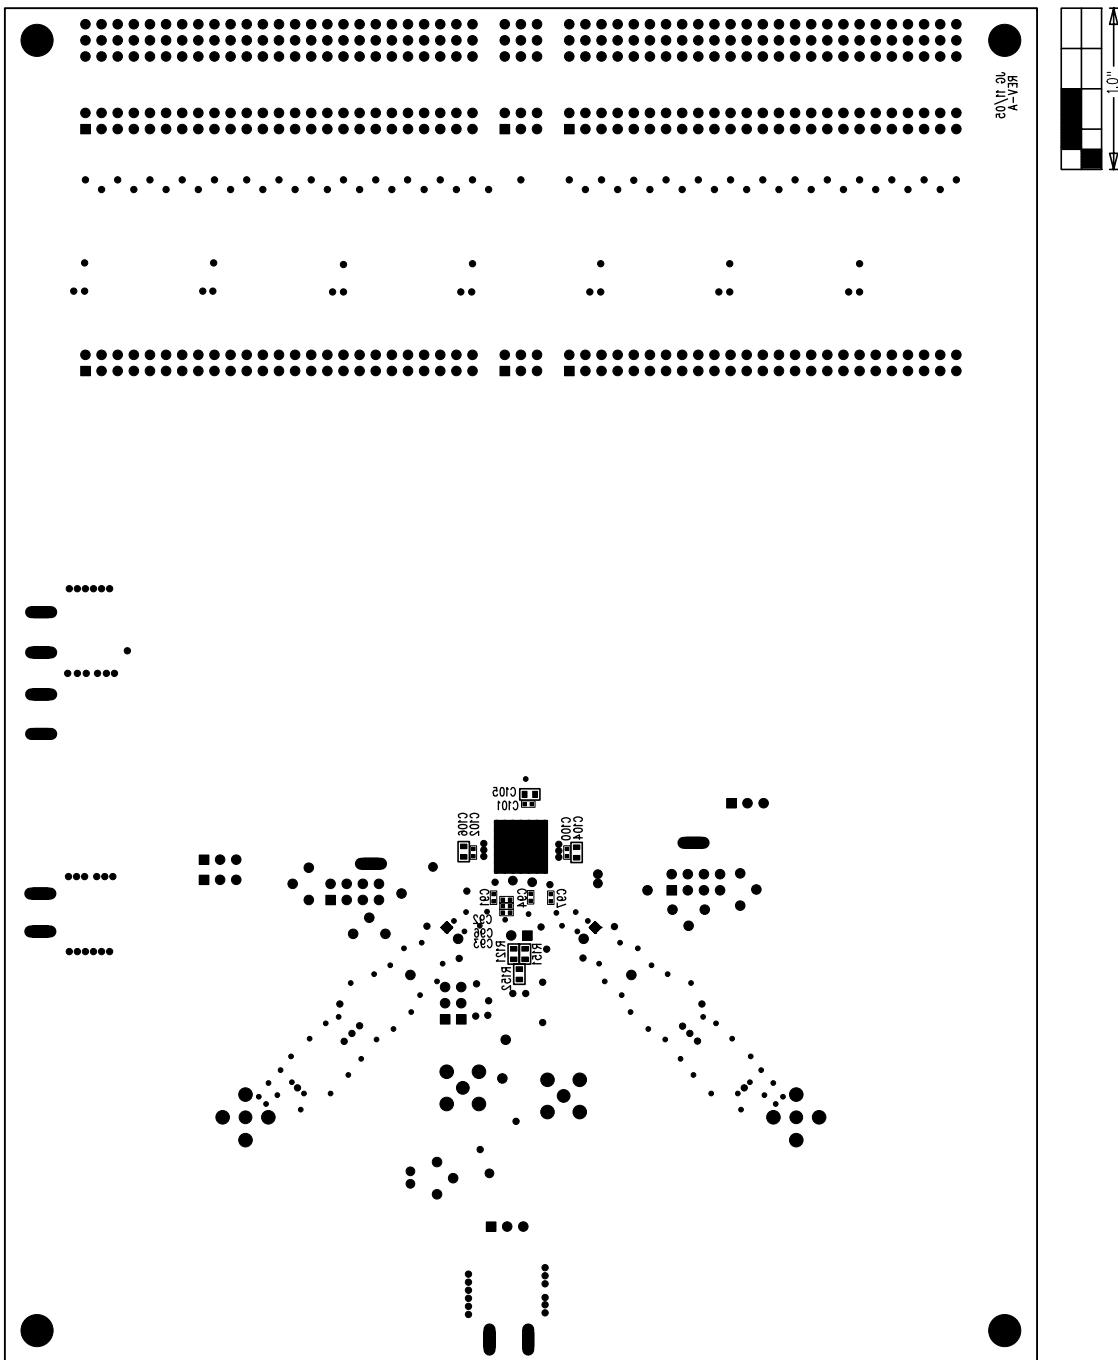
MAX1217/MAX1218/MAX1219 EV Kit Component Placement Guide—Solder Side
